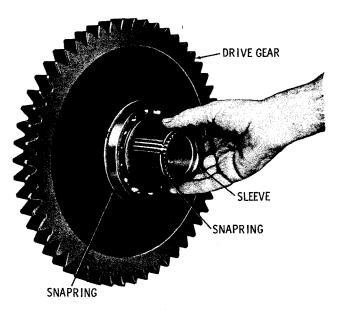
Installing high-range sun gear sleeve into transfer drive gear (TRT-1)
